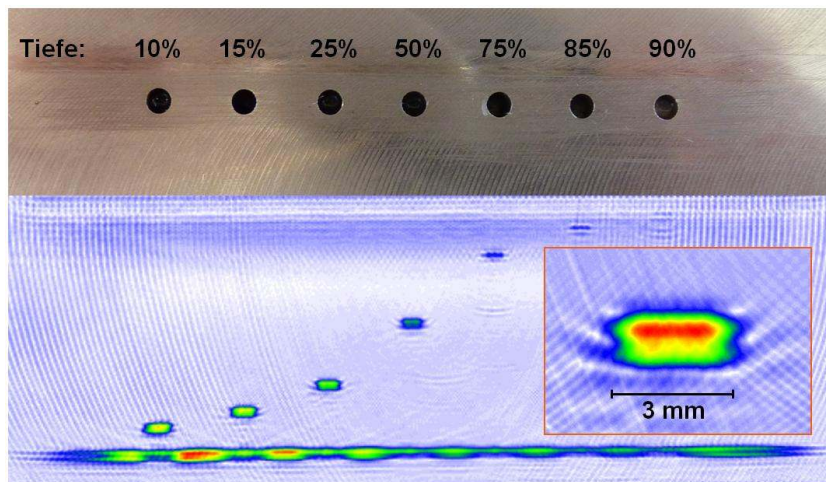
Reconstruction of flat bottom holes of 3 mm diameter and different depths. The red framed region shows a more detailed reconstruction of the 50% flat bottom hole. Here, the sizing with the 6 dB drop method would be possible.
